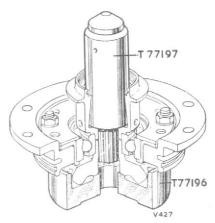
Assembling the breather chamber to the bore of the generator vertical drive bevel gear
